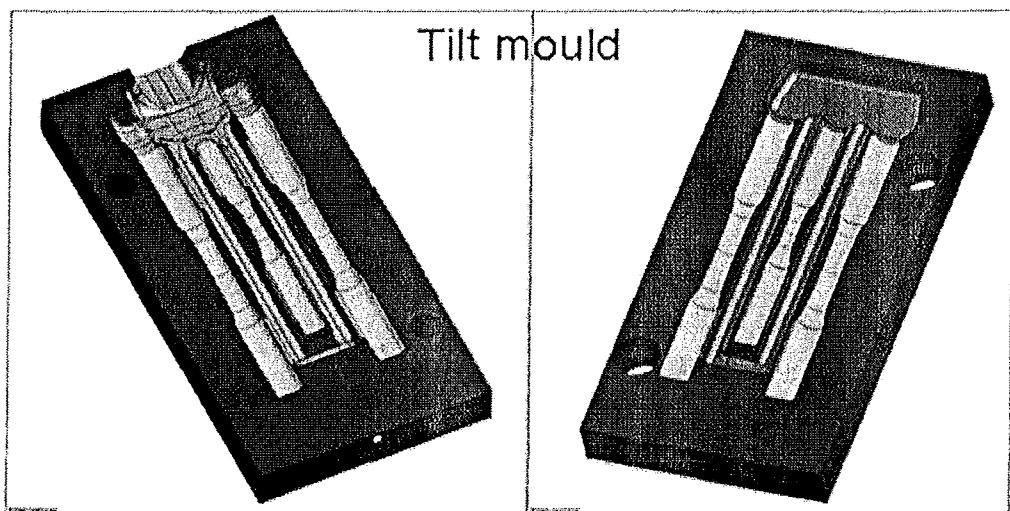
Two halves of the mould designed in this project for tilt-pour castings..
